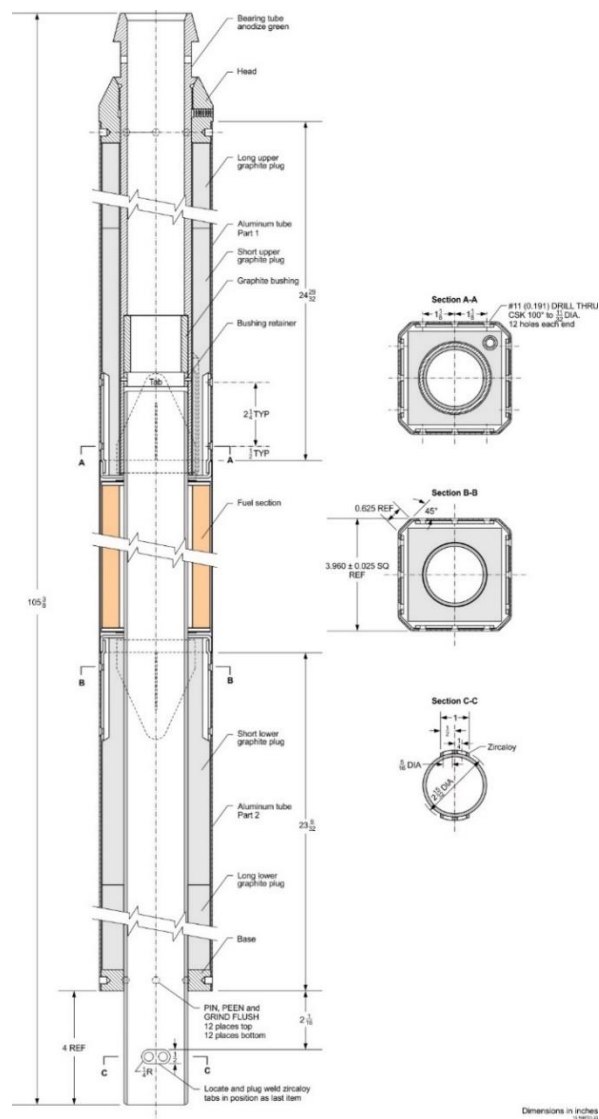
Control Rod Fuel Assembly (DWG# RE-1-22602) [1].
